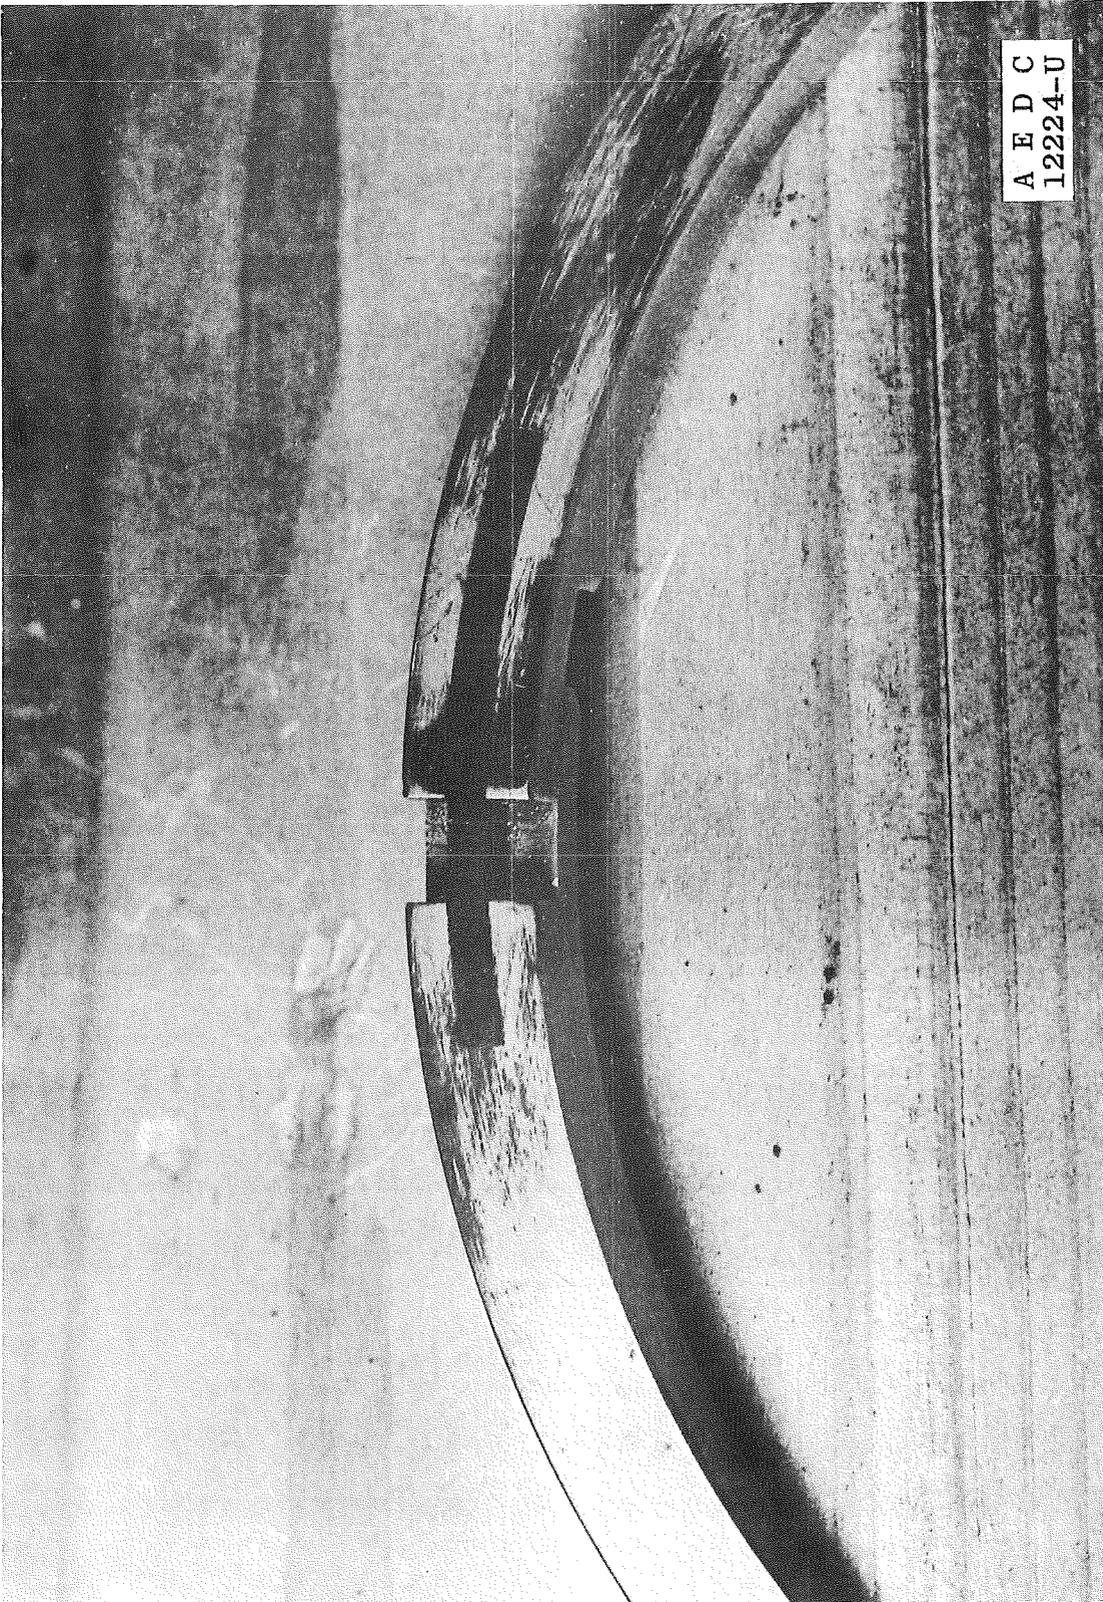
Modified Piston Ring Seal - Tunnel C Mach 10 Throat
